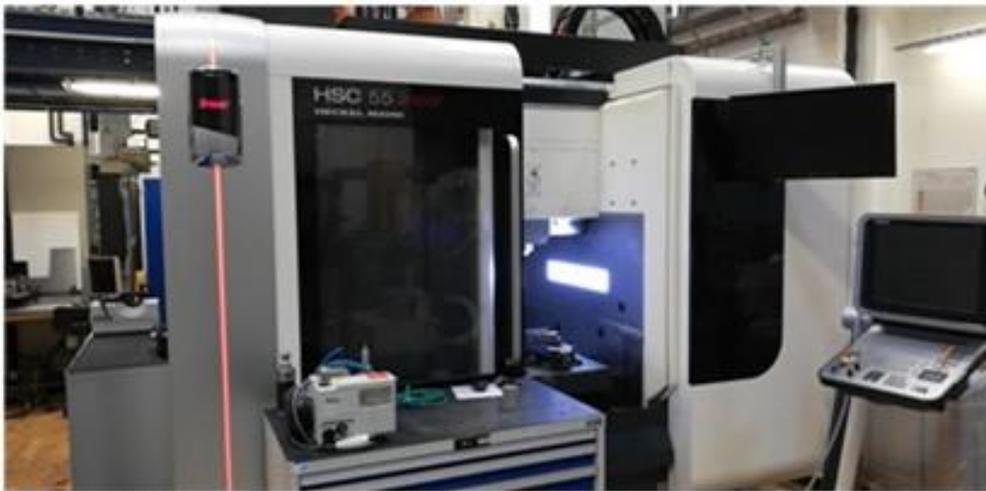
Machine tool (experimental machine) at the Fraunhofer IPT
